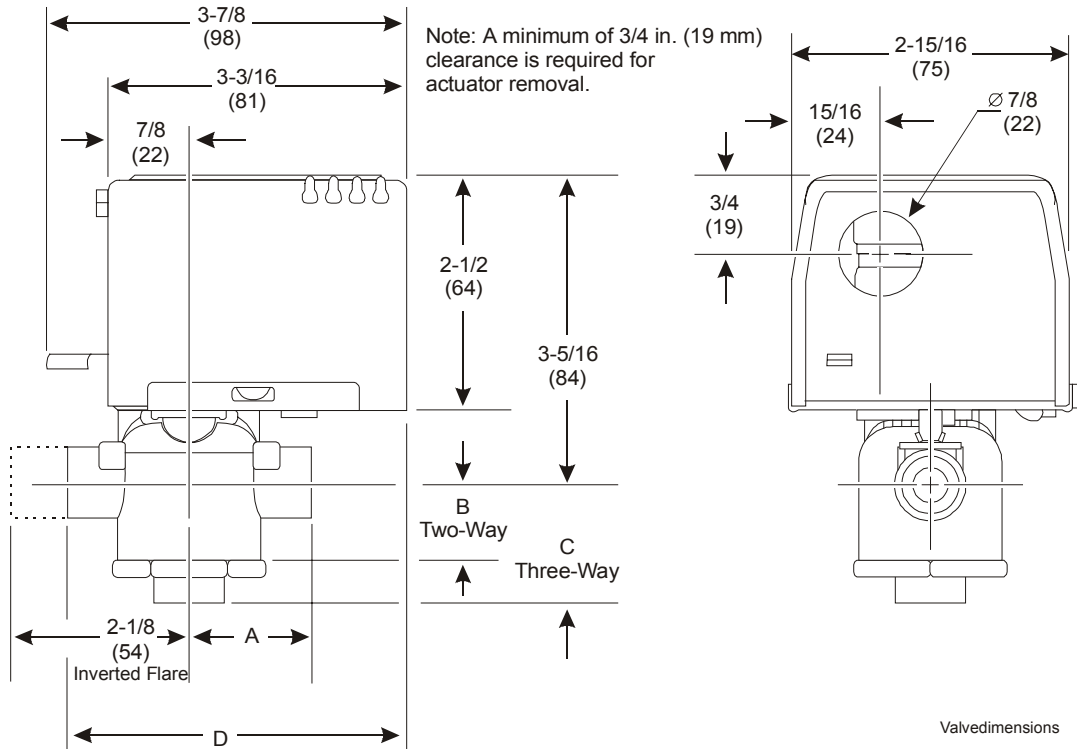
JT and JS Series On/Off Electric Zone Valve Dimensions, in. (mm)
